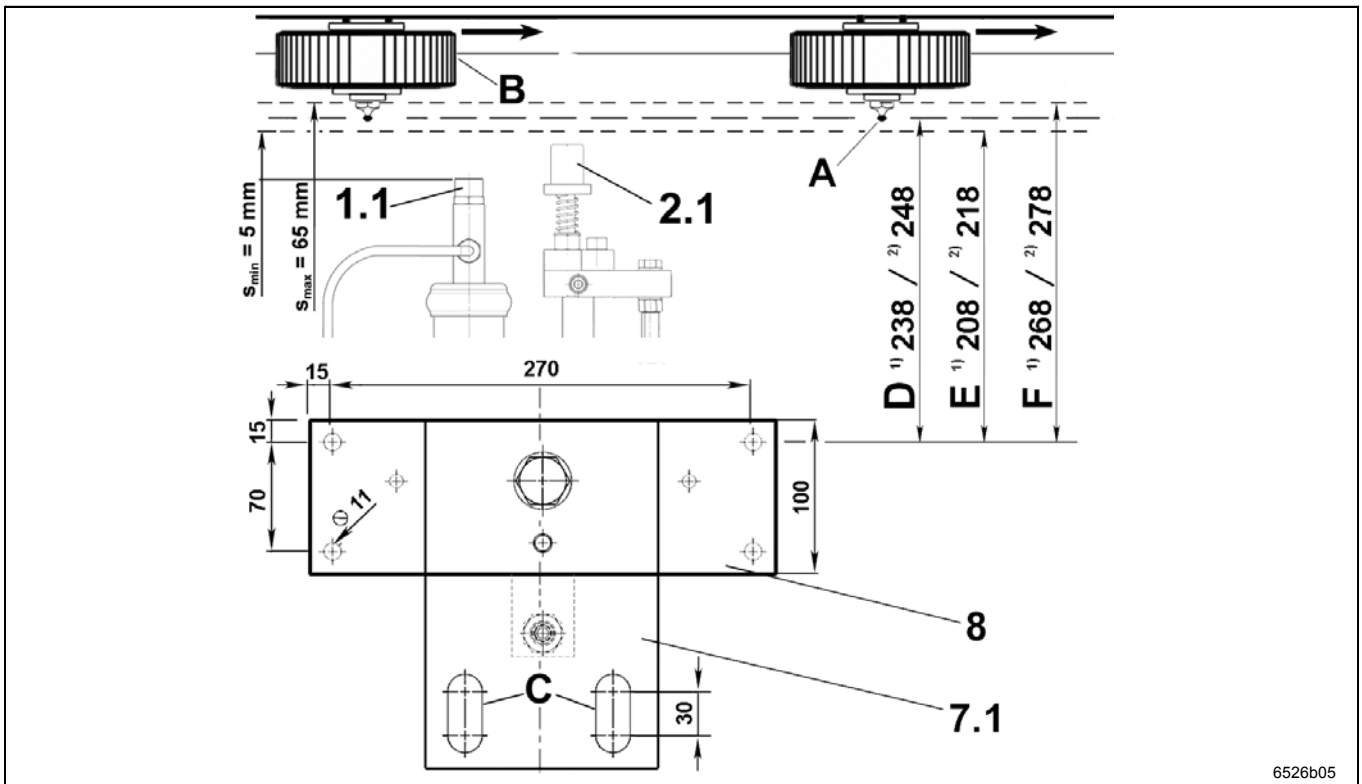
Assembly of the COBRA 1X-2 ⁽¹⁾ nozzle for hydraulic lubrication fitting/ ⁽²⁾ flush coupler)
